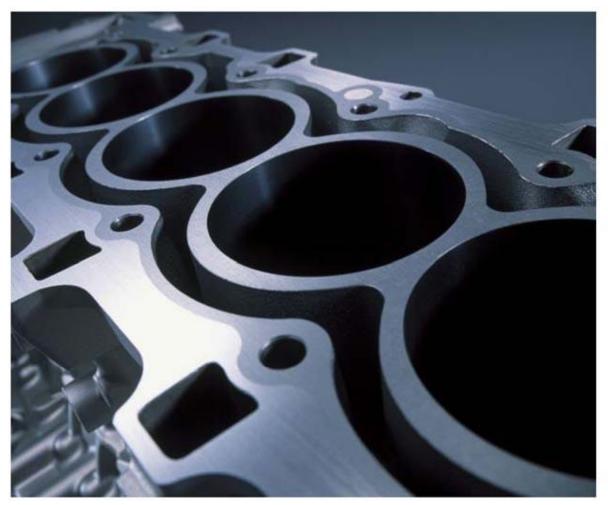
Identifying Cylinder Bores Courtesy of BMW OF NORTH AMERICA, INC.
